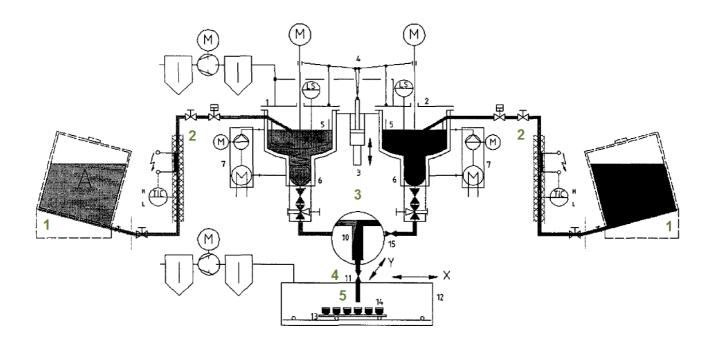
Continuous vacuum preparation and casting system. (1) Vacuum metering mixer, resin component; (2) Vacuum metering mixer, hardener component; (3) Pneumatic central drive; (4) Lever arm system; (5) Stirrer; (6) Metering pumps; (7) Heat exchanger; (10) Static mixer; (11) Reactive mix outlet valve; (12) Vacuum casting chamber; (13) Pallet; (14) Casting mould; and (15) Resin flush valve. Source: (13)
